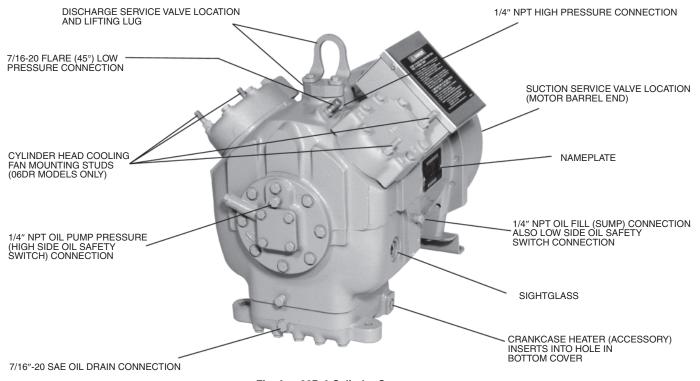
06D 4-Cylinder Compressors 18 and 20 CFM (.52 and .56 m³/min)
